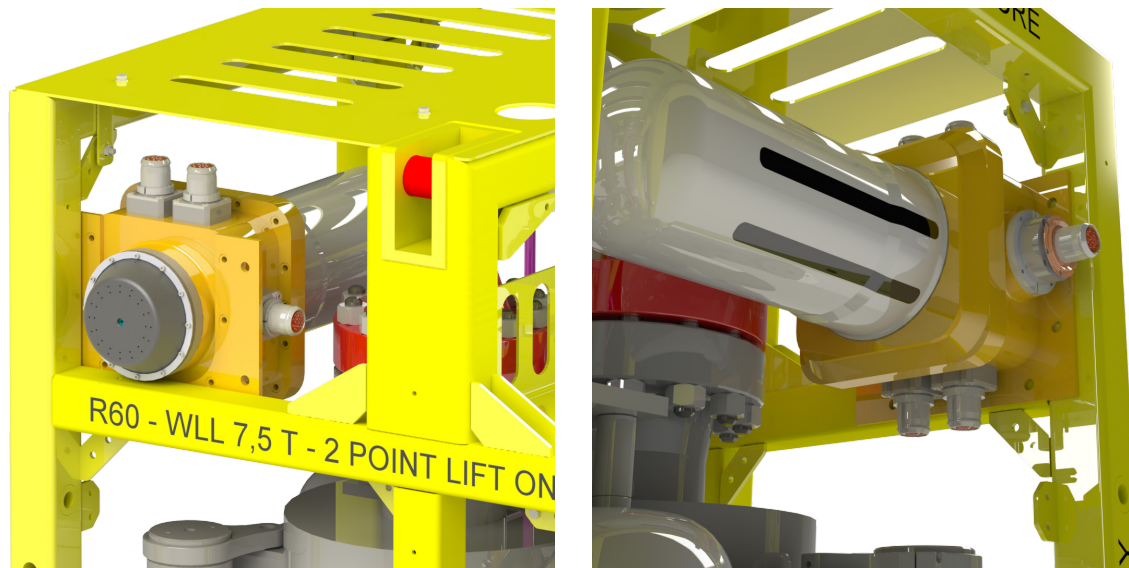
Render of horizontal fastening idea placed on FCM (Private picture, 2023)
